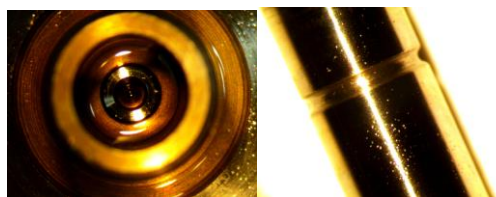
a) a valve controlling the operation of fuel injector, b) a valve plunger
